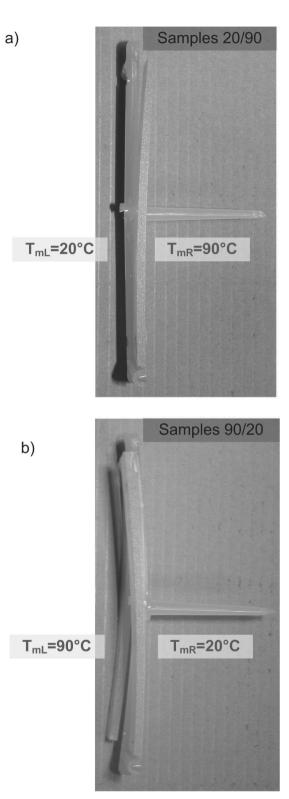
Photography of deformed parts: a) samples 20/90, b) samples 90/20
